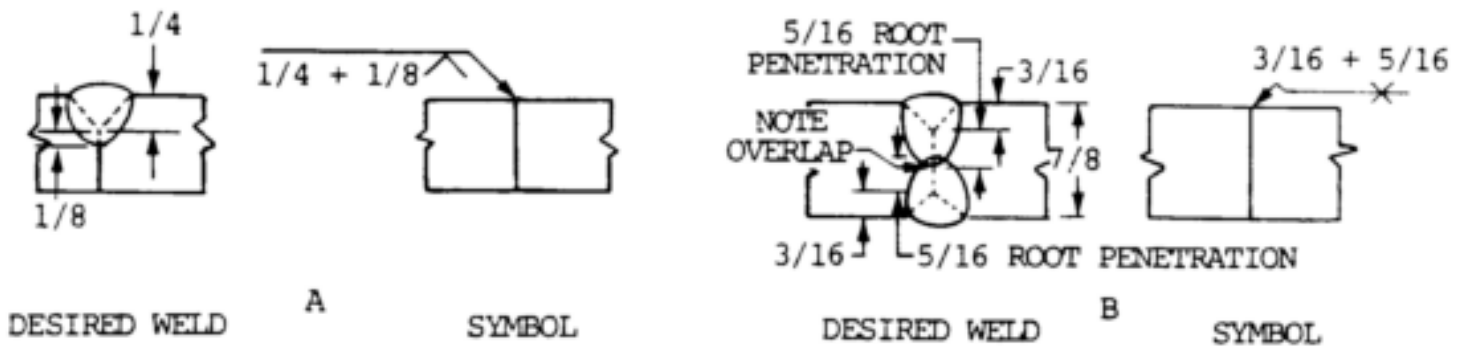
Dimensions of groove welds with specified root penetration.
